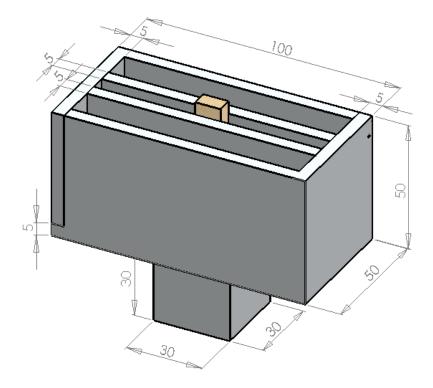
PMMA Guided Aluminum Grip (measurements in millimeters)
